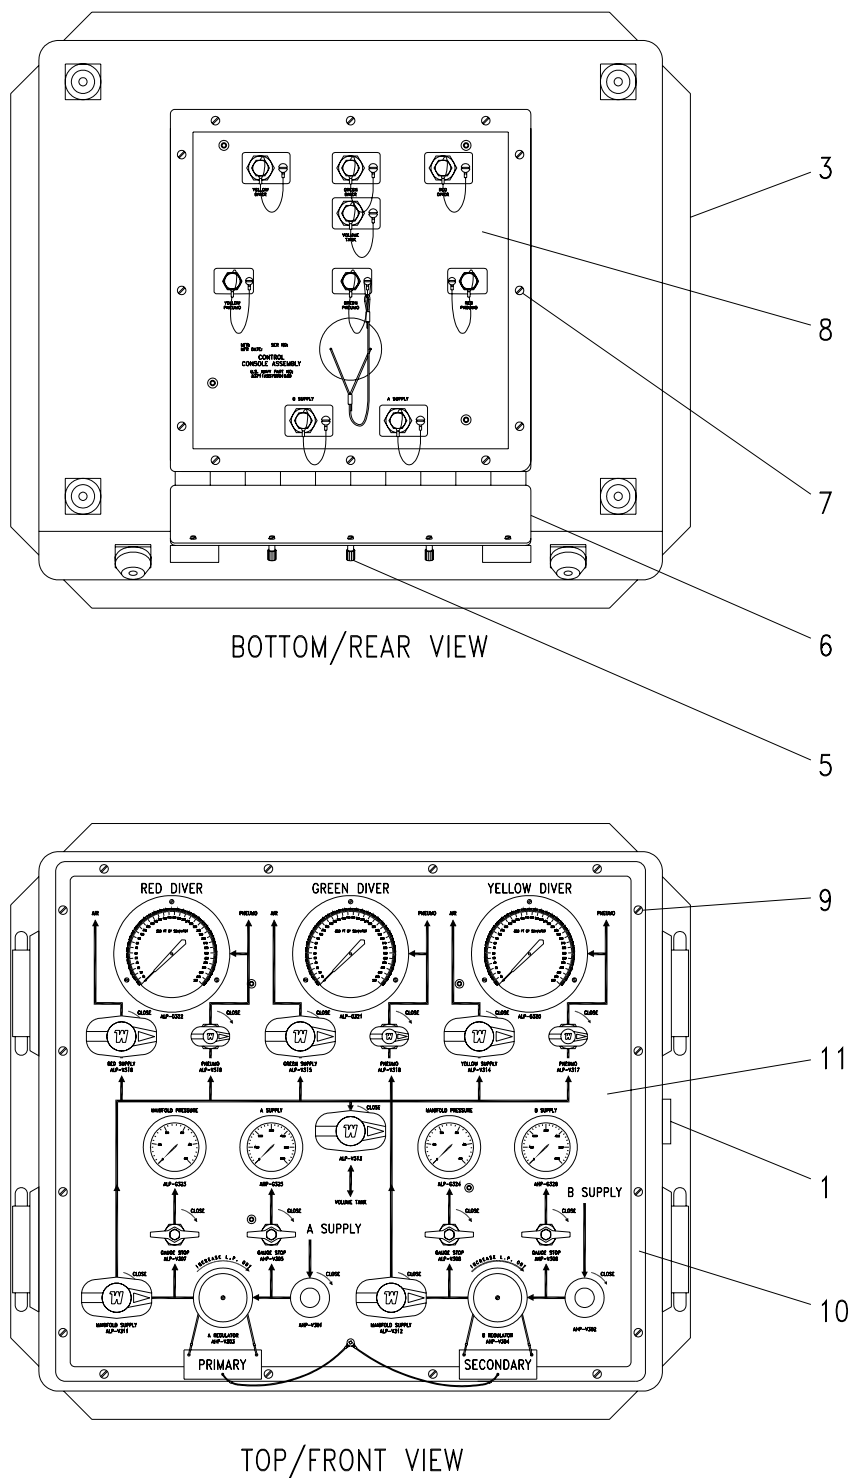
Removing/Reinstalling Control Console Panel Assembly (Sheet 2 of 3)
